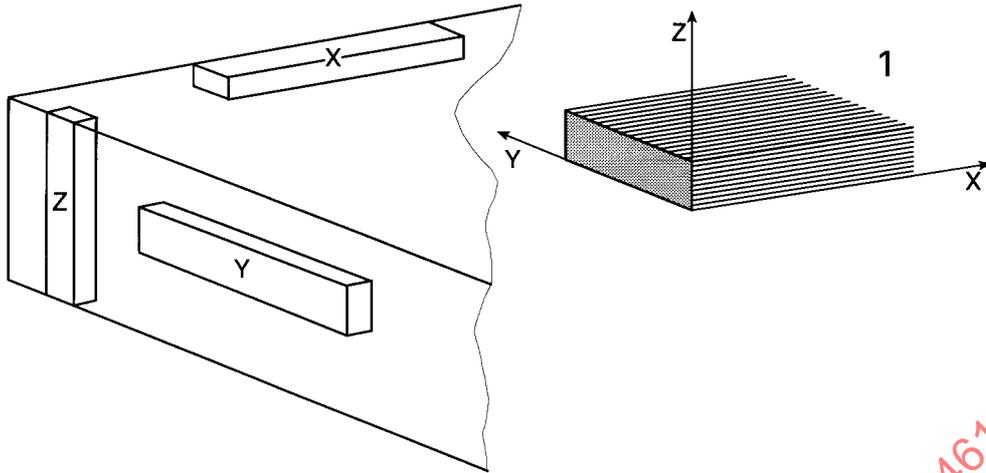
Example of the position of the test pieces in a sample product with integral surplus material in accordance with table 4 concerning the distance of the test pieces from the surface of the as heat-treated forging
